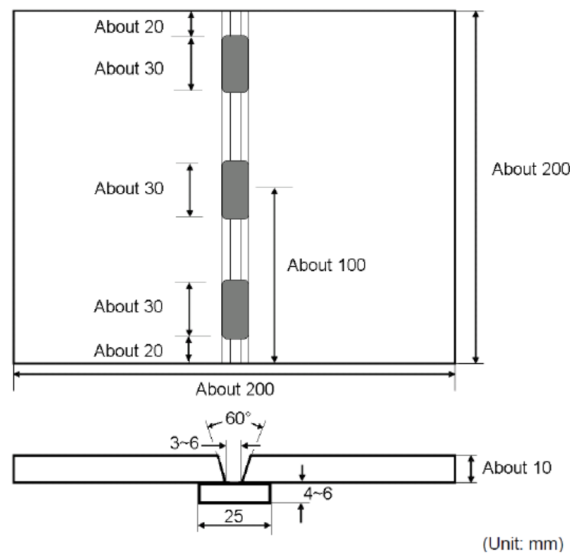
Dimensions and types of test piece for tack butt welds
